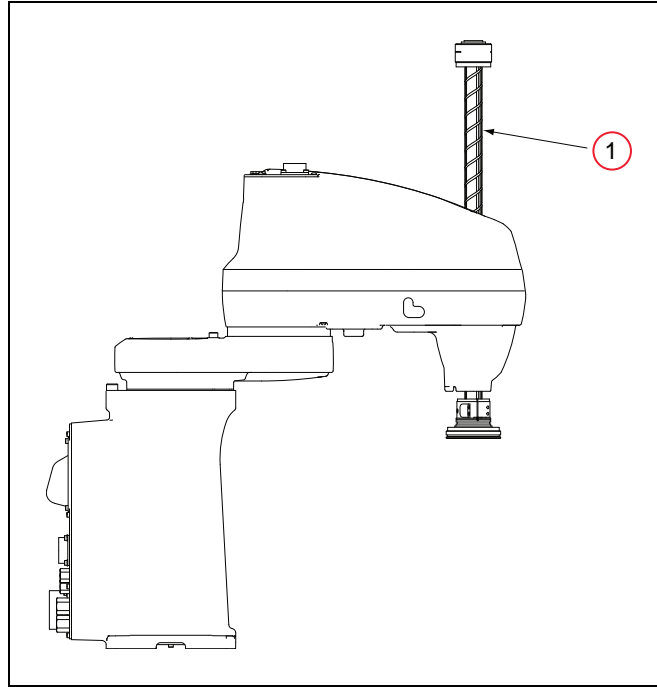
(1) Lubrication of Joint 3 Quill Shaft
